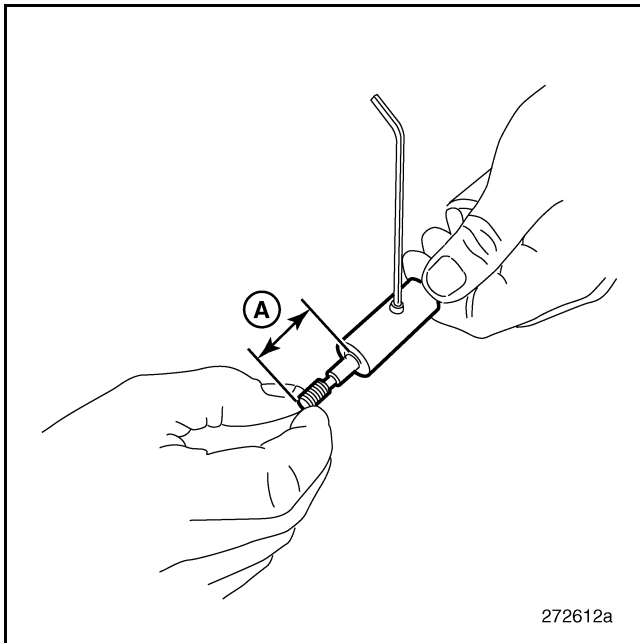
Adjusting Copper Sleeve Extractor Bolt
